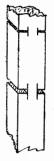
Upright Bars Moulded and Sawn Asunder.
